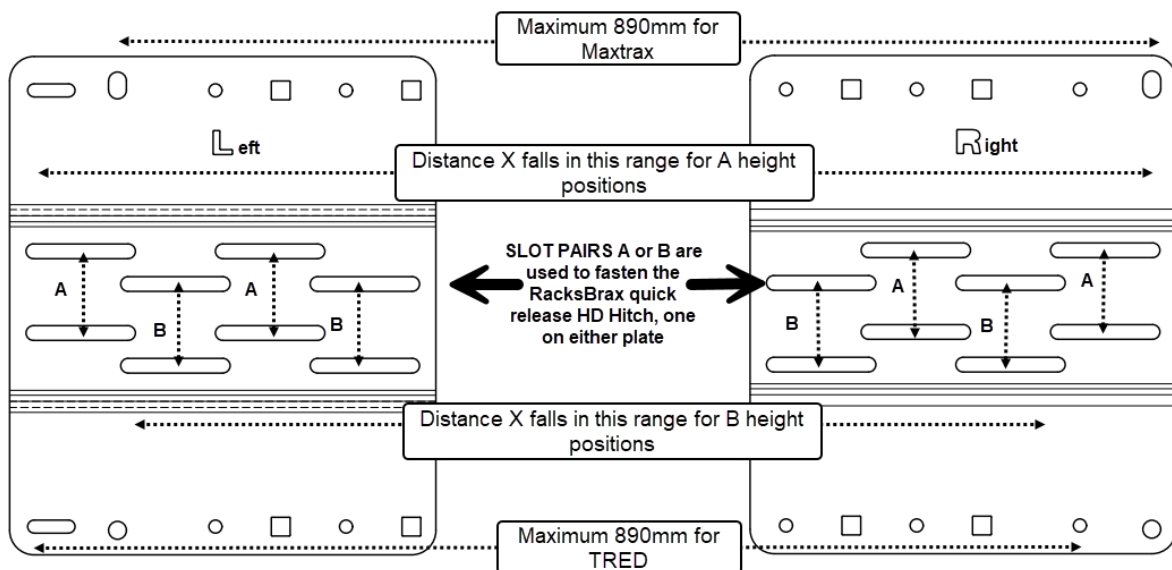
RacksBrax quick release HD Hitch fastener slot pairs A and B.
